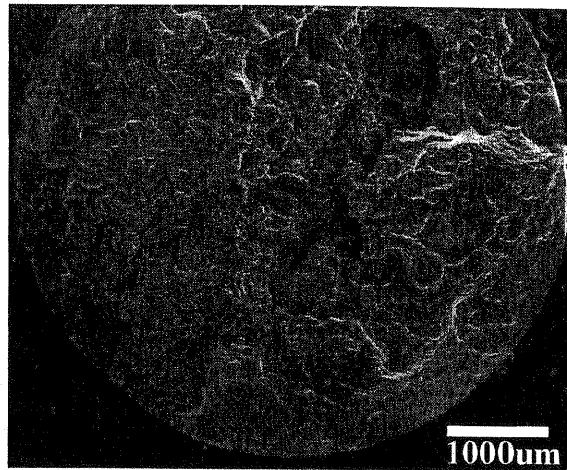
Typical fracture surface of a macroporous specimen from Sigl et al.⁷
